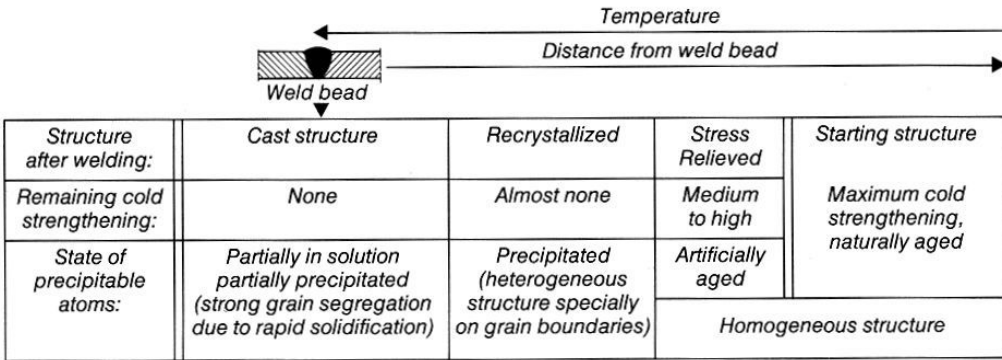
Structure of a weld bead and the adjacent areas (weld bead in age-hardened, cold-worked alloy). (Altenpohl 1982)
